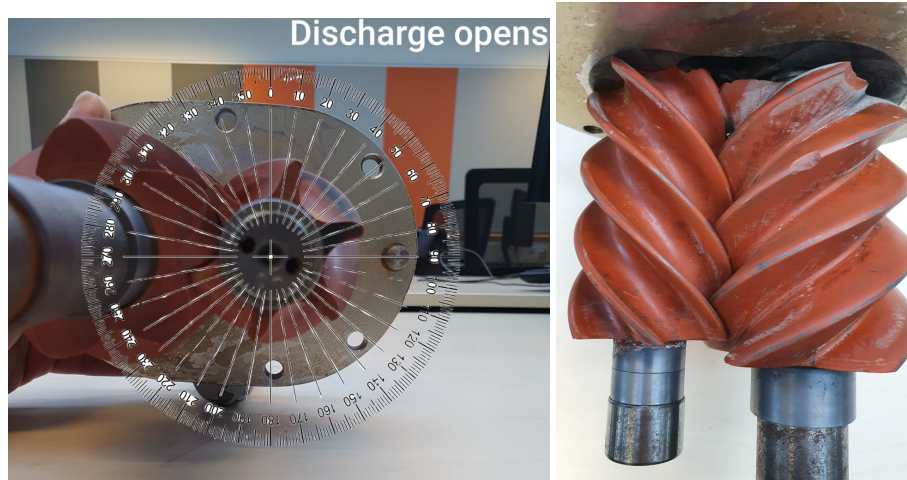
Left: The rotation angle of the female rotor when the discharge port opens. Right: The considered lobe just touches the discharge port. It may appear that the lobe is a few degrees ahead of the port, but the rotor tip being chipped has been taken into consideration.
